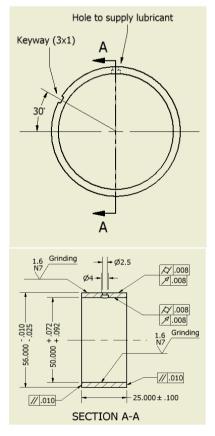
Details of the bearing fabricated for testing [Muzakkir *et al*, 2012]
